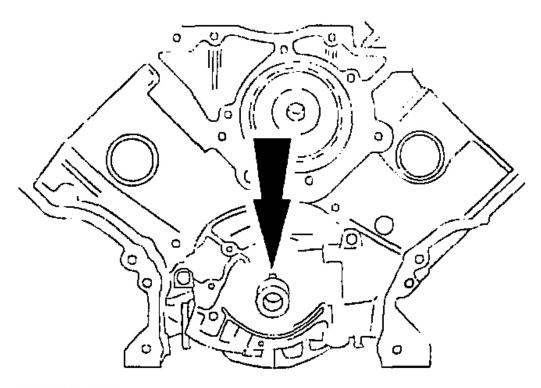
Removing Balance Shaft Courtesy of FORD MOTOR CO.
